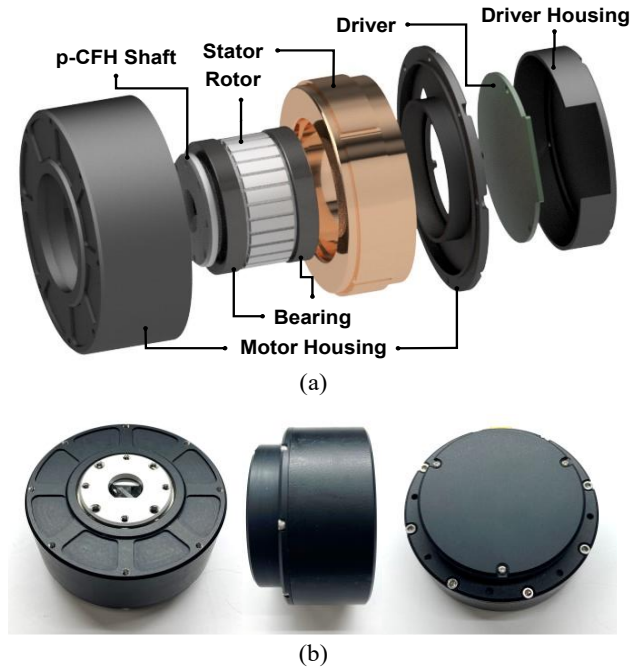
(a) Expanded view of the actuator. (b) The modular multi-axis elastic actuator with fully assembled.
